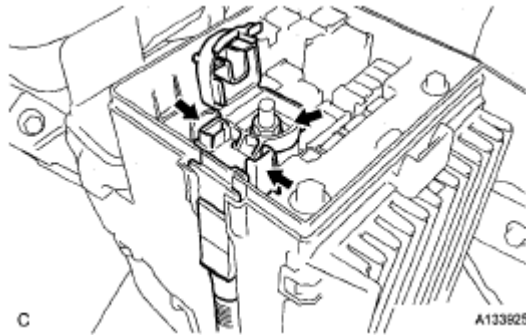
Unlocking Engine Room J/B Using Screwdriver
